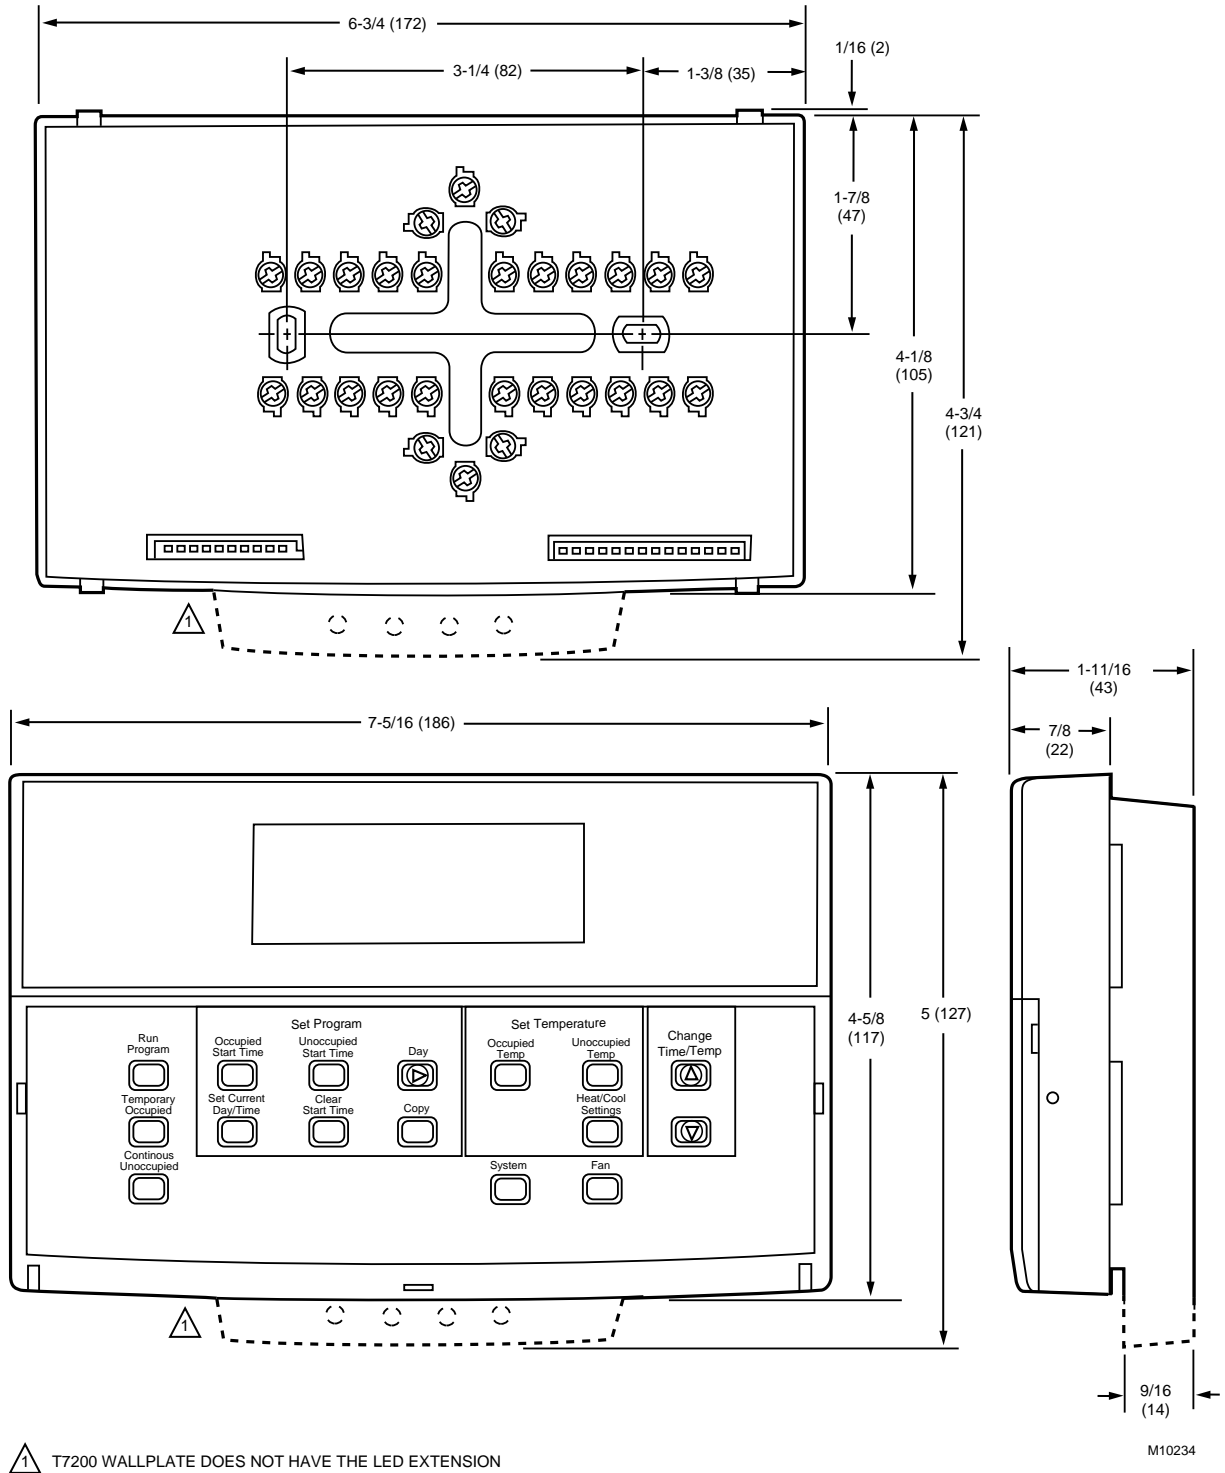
Dimensions of T7300 and Q7300 in in. (mm).
